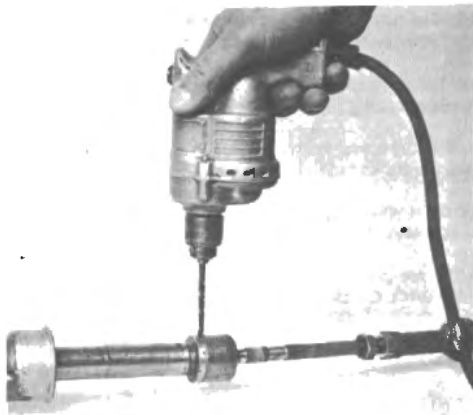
Boring out the ball joint lock pin (new type joint)
